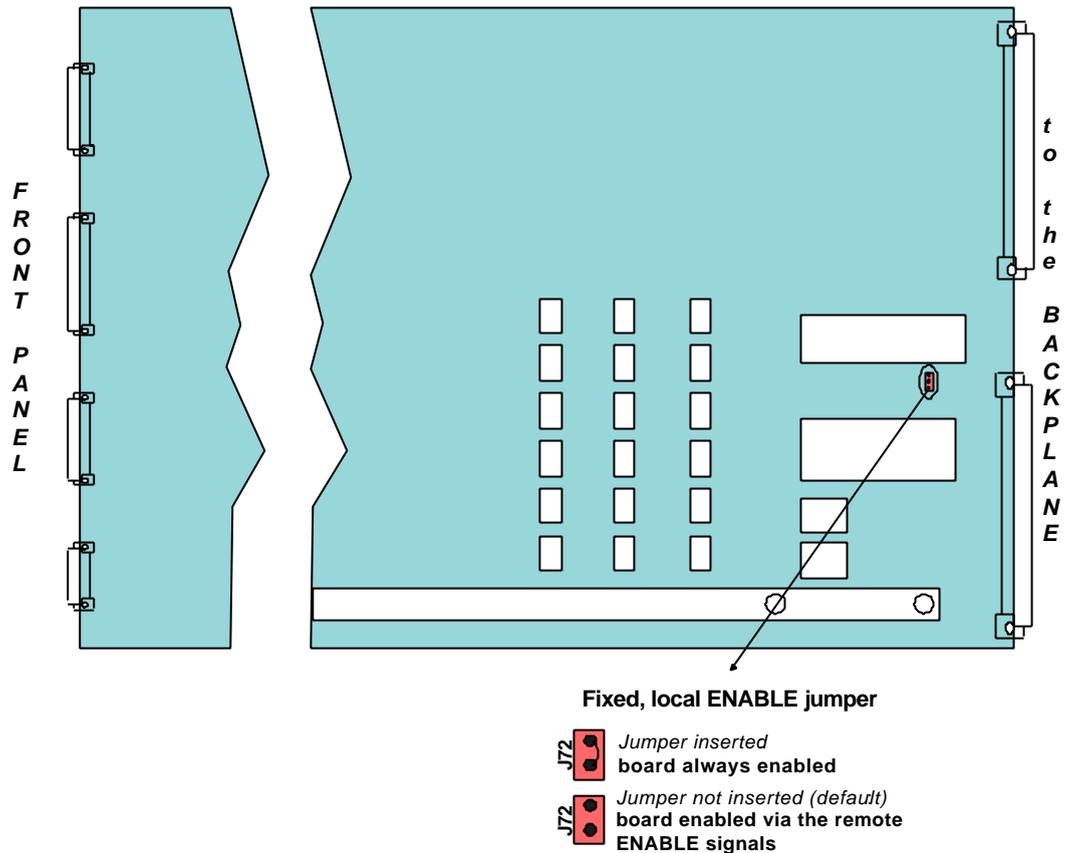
Main printed circuit board: jumper setting for local fixed ENABLE mode
